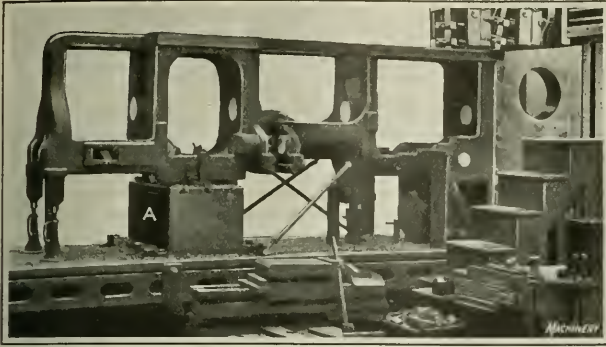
Automatic Screw Machine Frame Casting set up for planing
